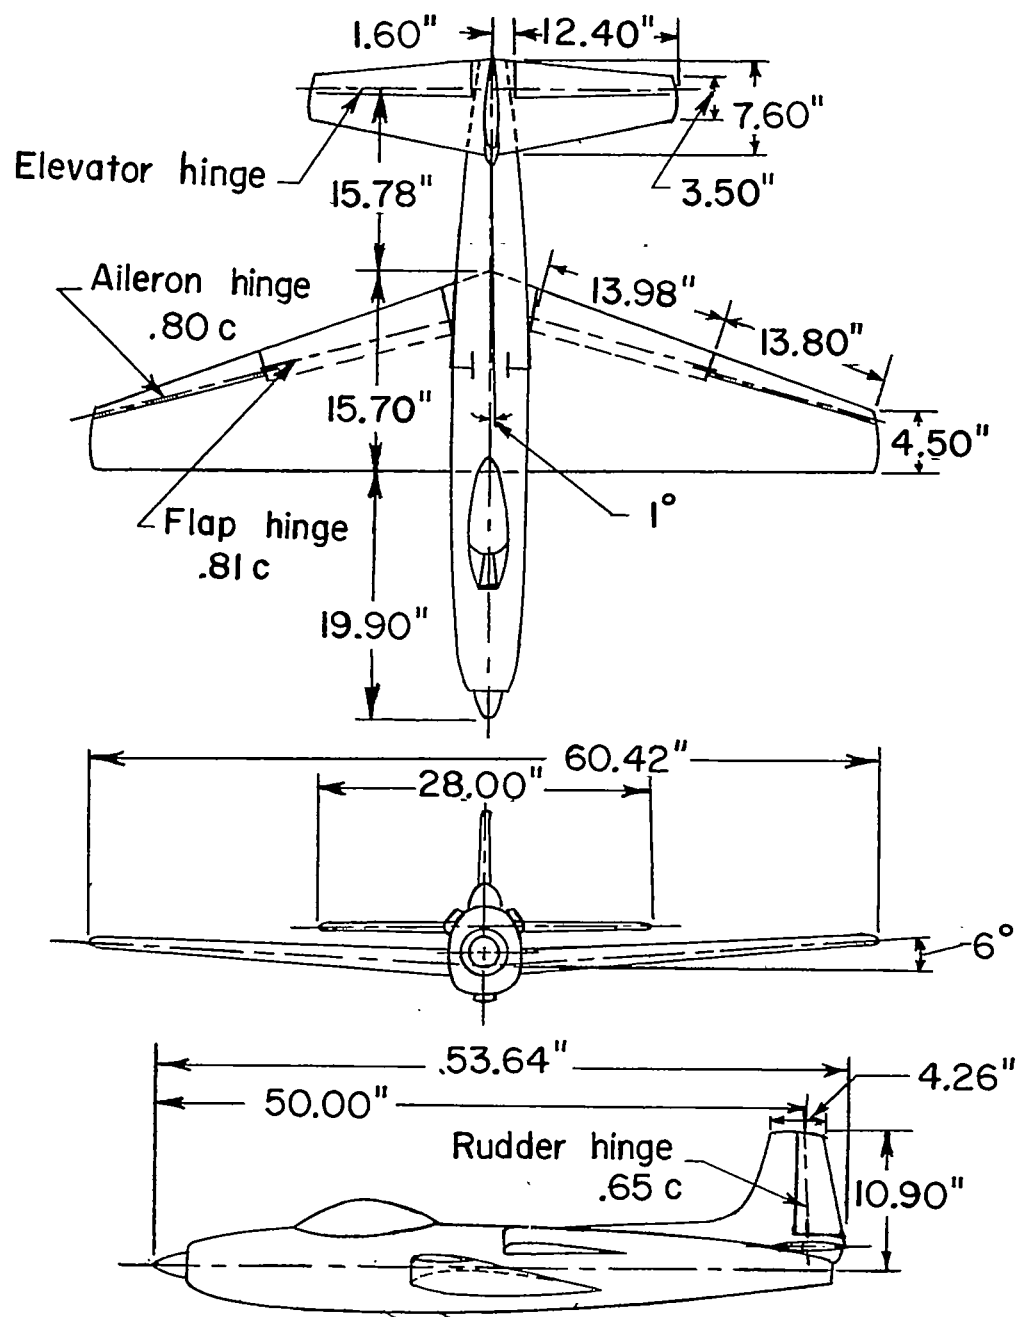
Drawing of 1/10-scale rotary-balance model of fighter airplane.
